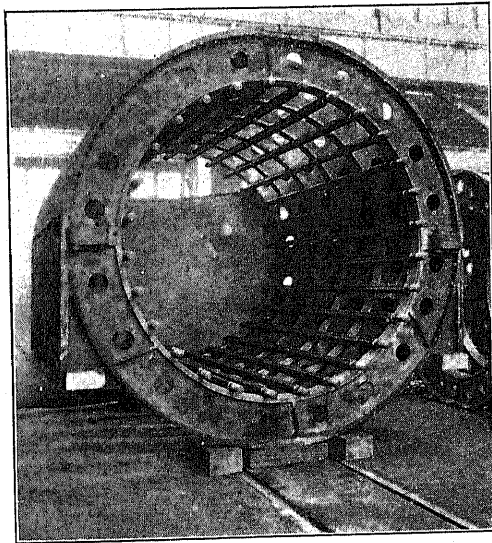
STATOR COMPLETE, READY FOR STACKING OF ARMATURE CORE OF 62,500-KV-A., 1200-REV. PER MIN. GENERATOR
